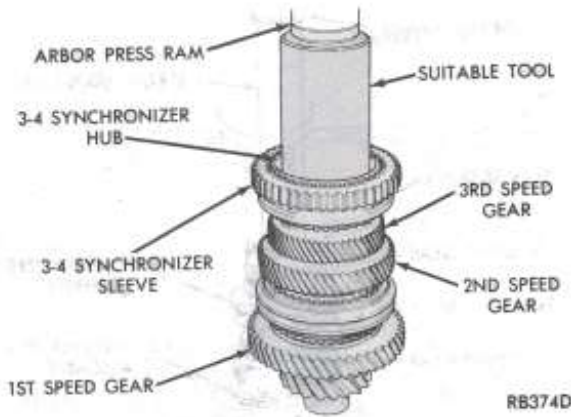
Install 3-4 Synchronizer Hub and 3rd Speed Gear
